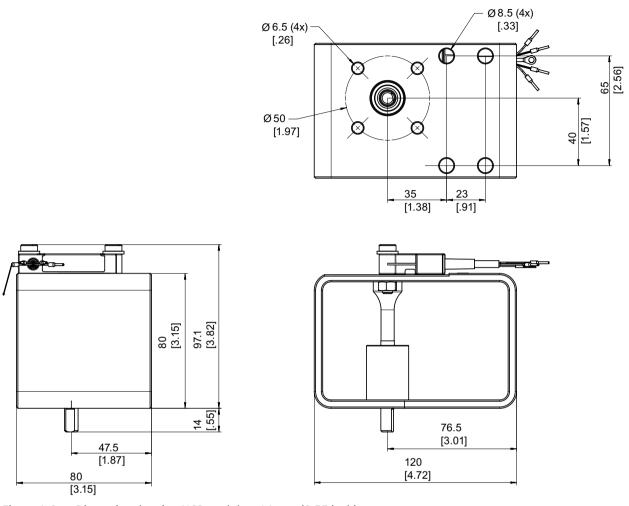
Dimension drawing NCS module > 14 mm (0.55 inch)
